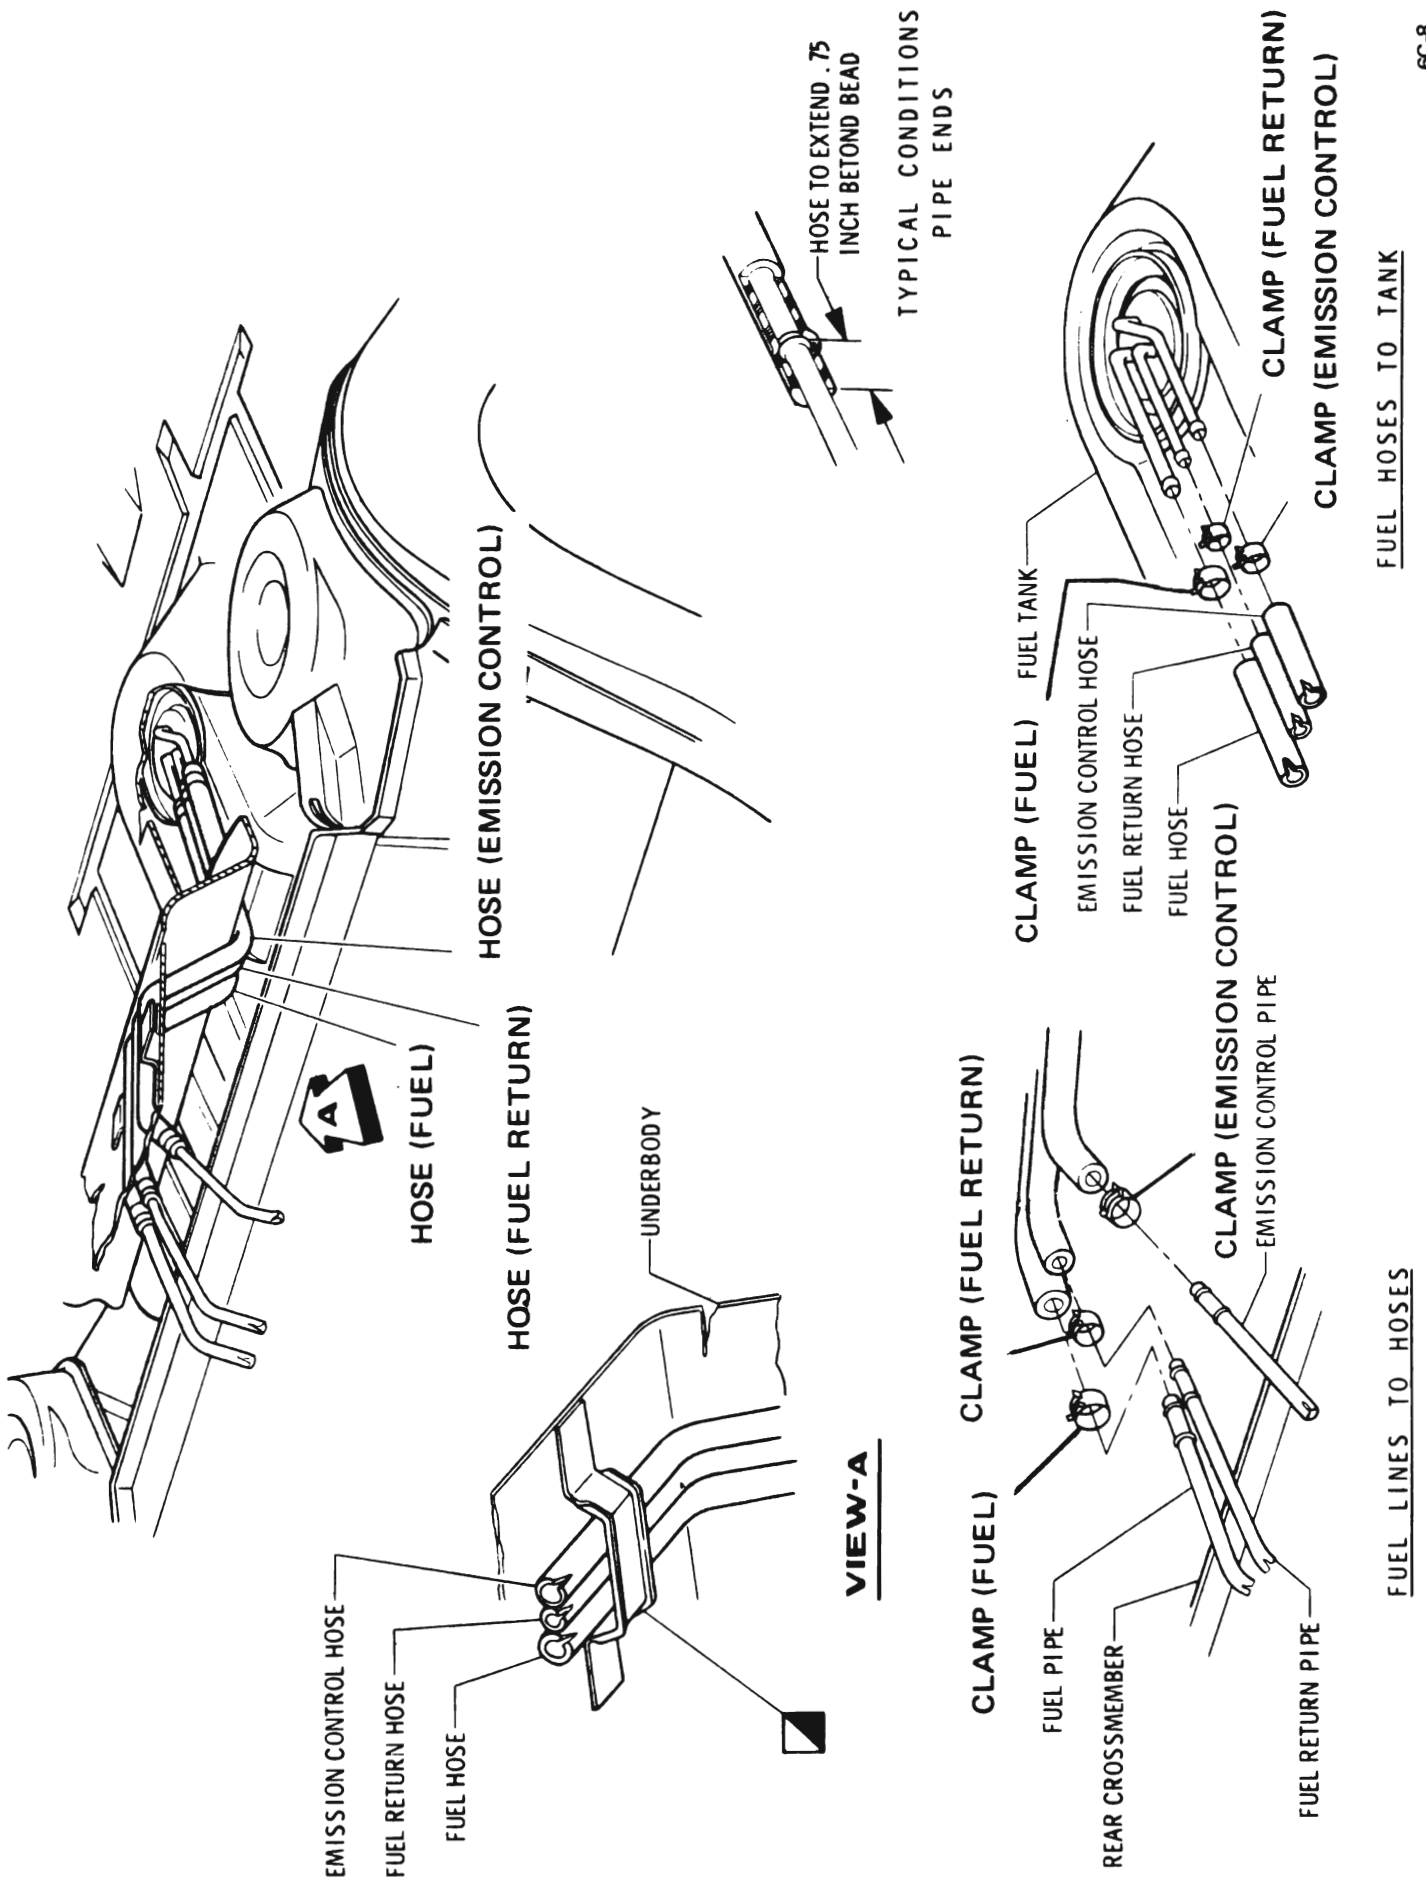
C-8 "A" Series Fuel Tank Hose Routing (Sedans and Coupes)
